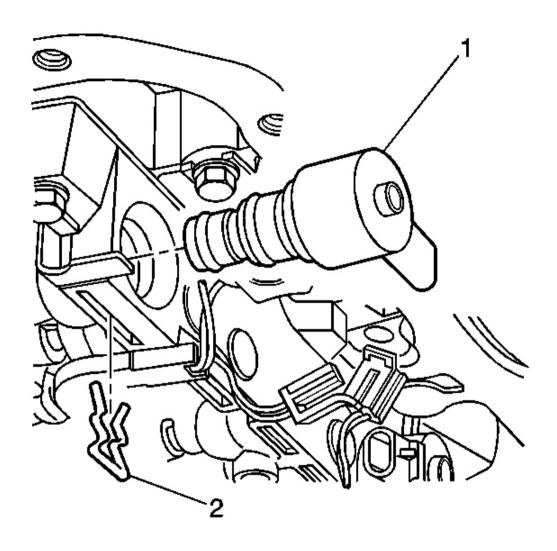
Installing The TCC PWM Solenoid Courtesy of GENERAL MOTORS CORP.
